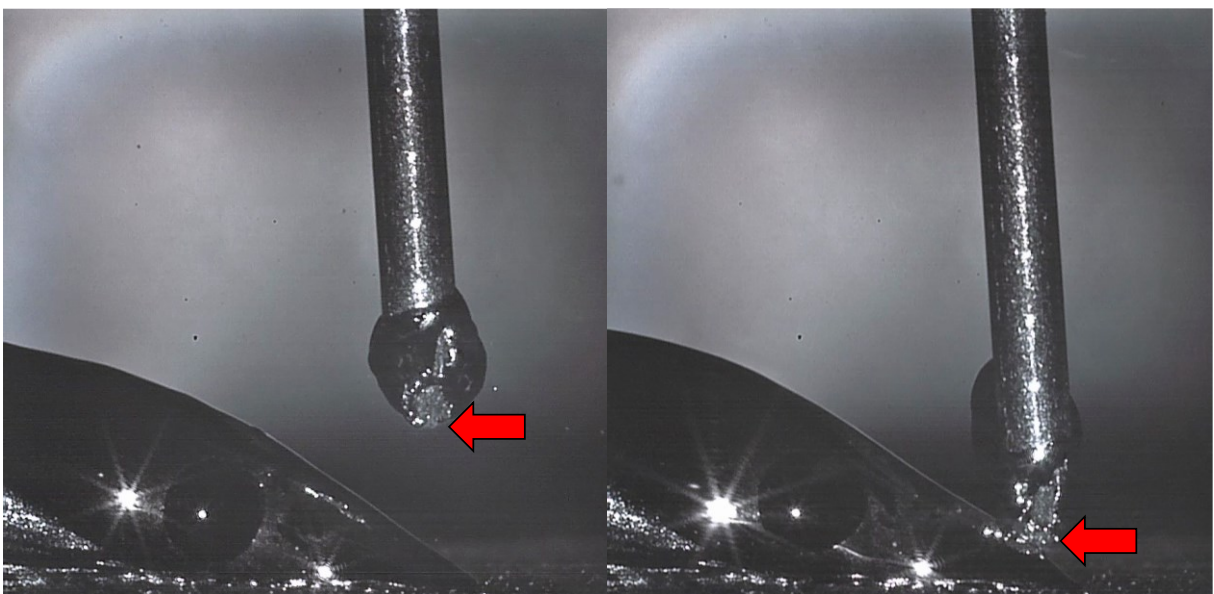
Solid core dives into welding pool. CMT Pulse variant.
